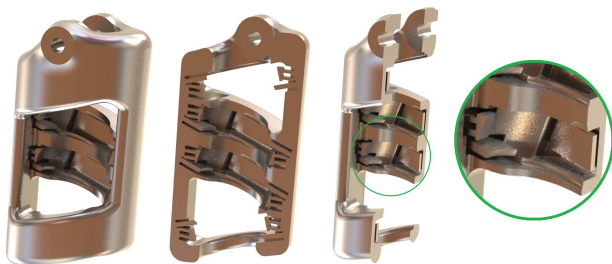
Third preload option uses a spring cage, integrated in the structure, that holds the bearing in place. This spring cage allows for self aligning of the rings and so compensates 3D printing inaccuracies.
